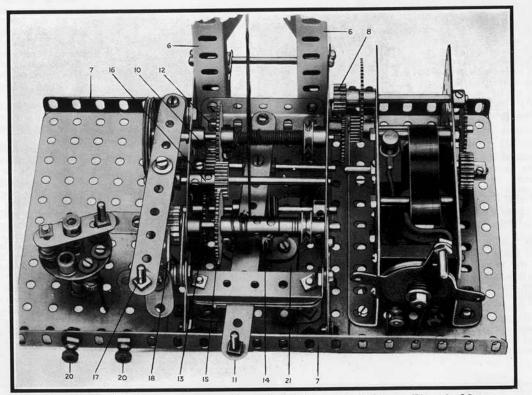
Partial plan view of Gear Box, showing layout of Gears, Electric Motor, Operating Levers, Brakes, Controller, etc.
